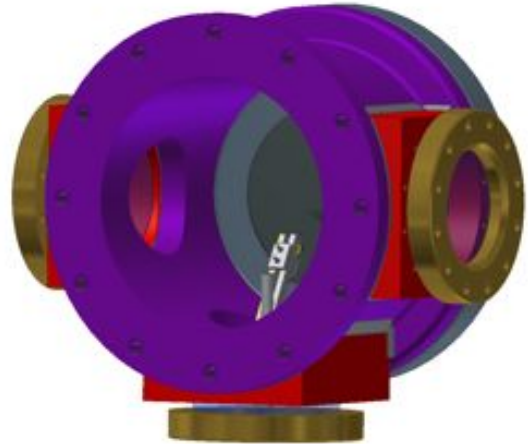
CAD diagram of the force transducer held the bracket, in position in the high pressure chamber. Chamber bottom plate removed.
